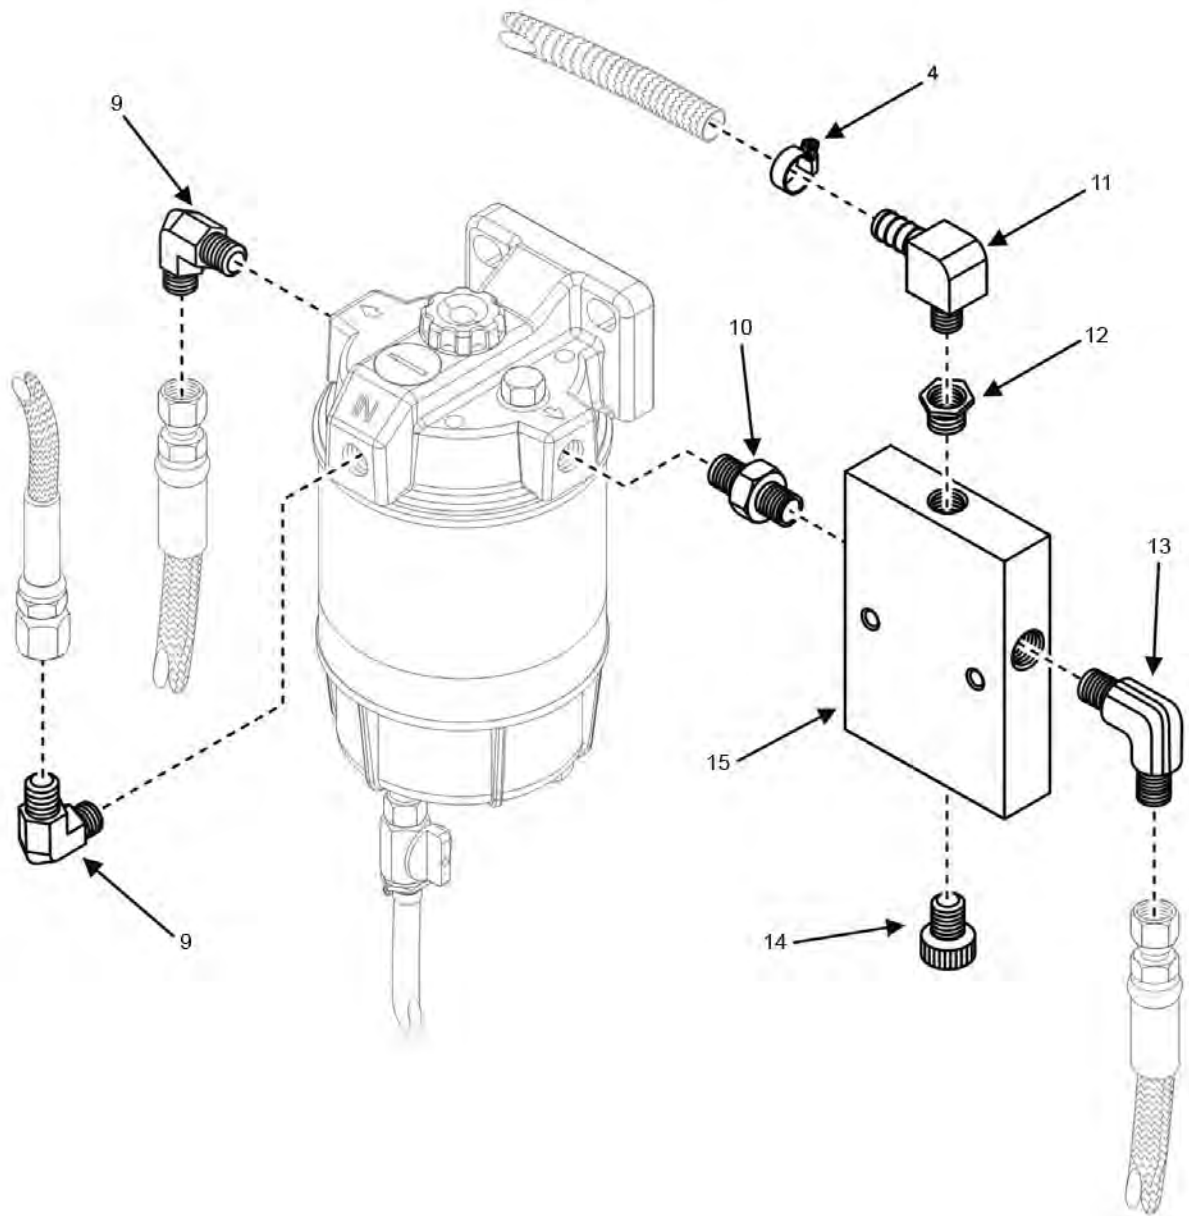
Fuel Filter/Water Separator Assembly (Sheet 2 of 3).
